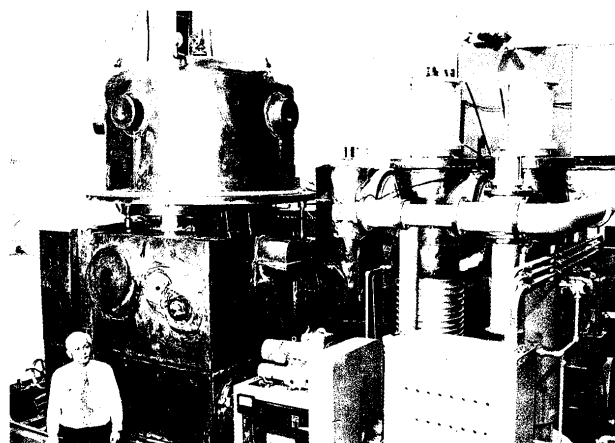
General view of 300 kV, 100 kW E.B. welder with 5 stage electromagnetic accelerating unit gun.
